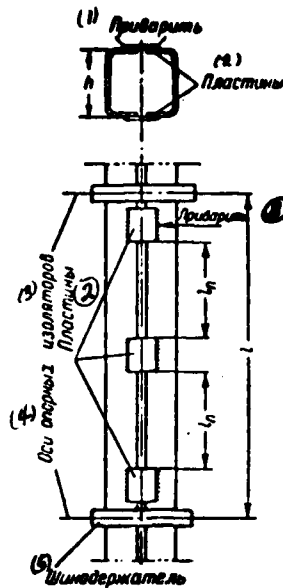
Arrangement/position of the planks, welded on to box busbars.
